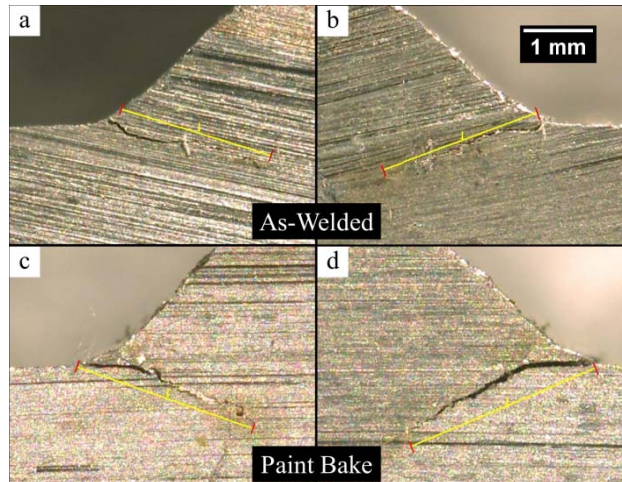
Micrographs of acid test specimens where: (a) edge A and (b) edge B of an as-welded specimen; (c) edge A and (d) edge B of a paint bake specimen
